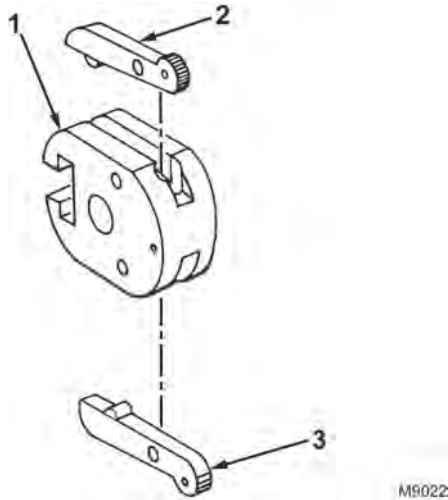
M9 Multipurpose Bayonet System Latch Assembly.
